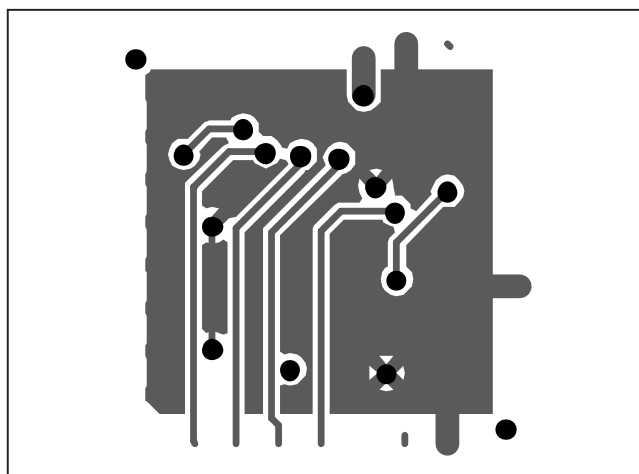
MAX21000 STAMP Board Adapter—Bottom View
